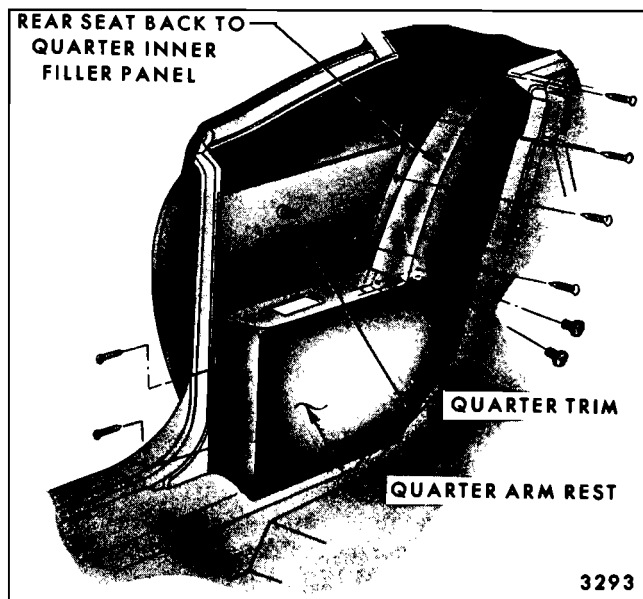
Rear Quarter Trim - "F-37" Styles
